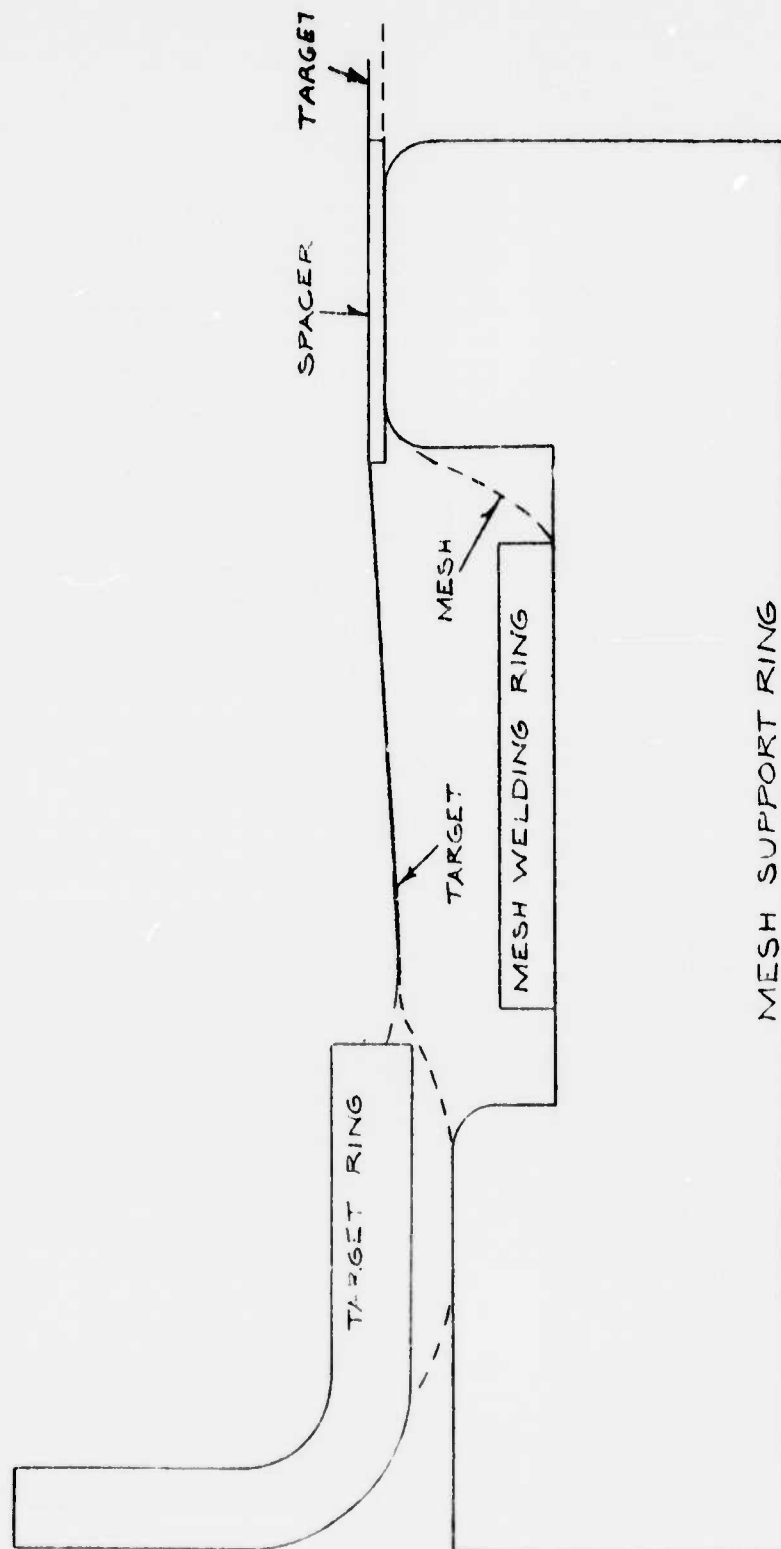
Sectional View of Image-Orthicon Target-mesh Assembly.
